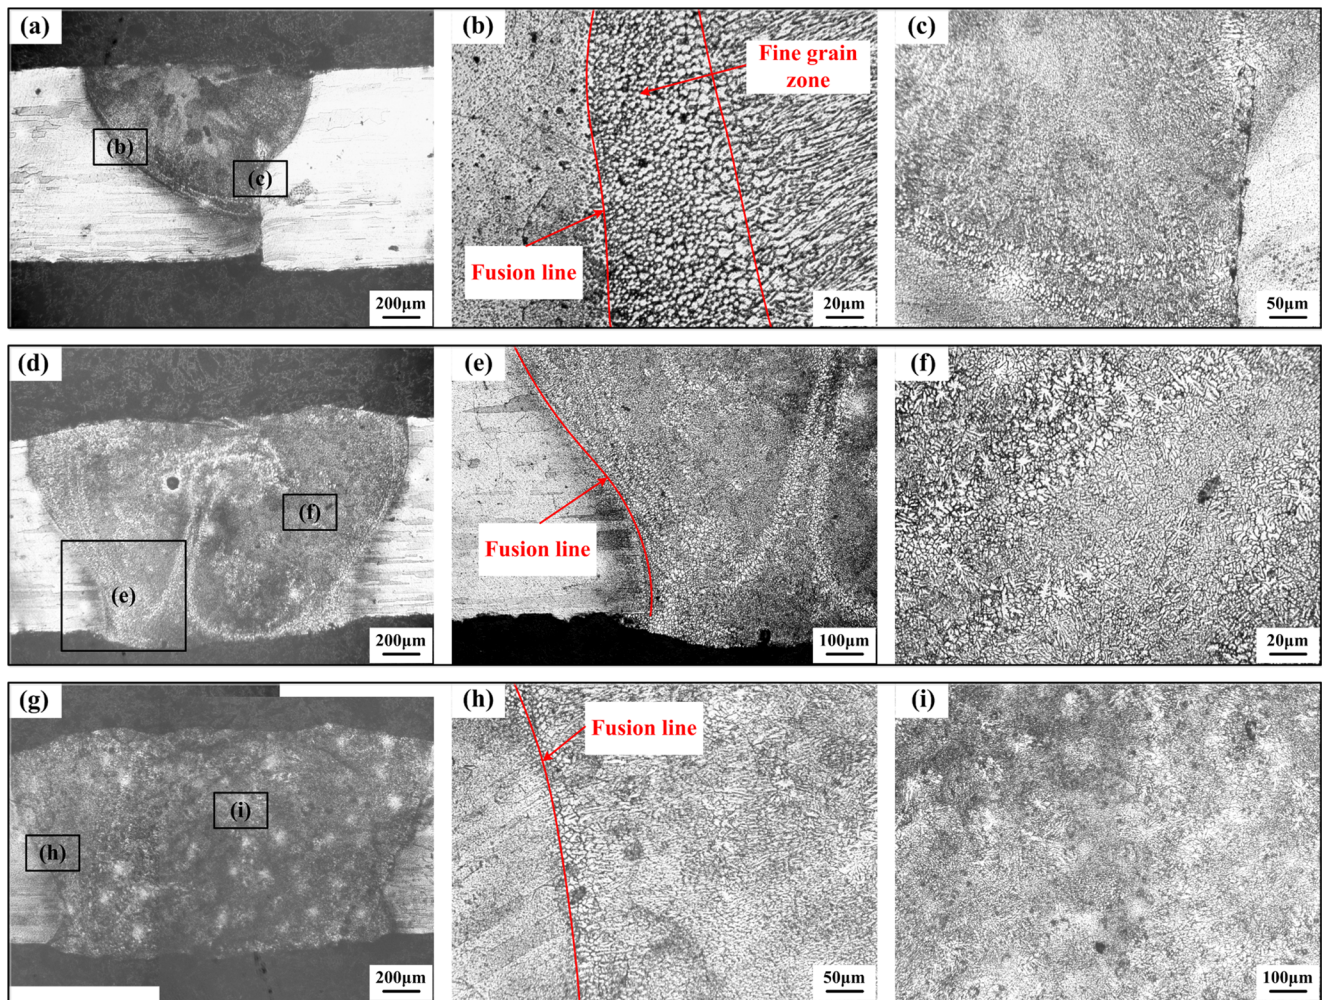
Morphologies and microstructures of the 1-mm-thick welded joint with different welding parameters: a $P = 2000$ W, $v = 4$ m/min, and $c = 1$ mm; b fusion line microstructure of weld bead in a; c fusion zone microstructure of weld bead in a; d $P = 2300$ W, $v = 4$ m/min, and
